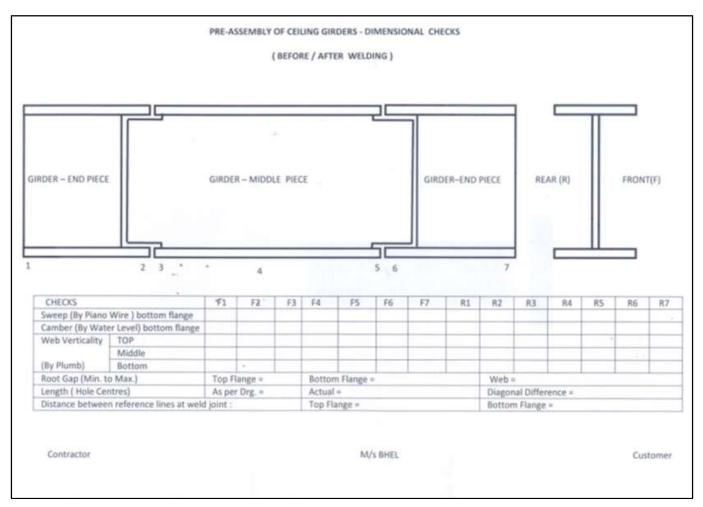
PRE-ASSEMBLY OF CEILING GIRDERS - DIMENSIONAL CHECKS (BEFORE/AFTER WELDING)
